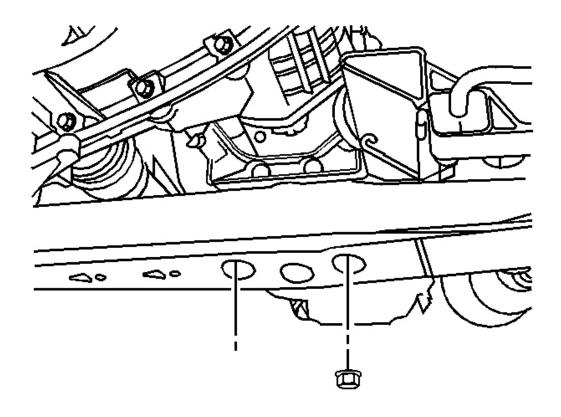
View Of Transmission Mount To Transmission Support Courtesy of GENERAL MOTORS CORP.
